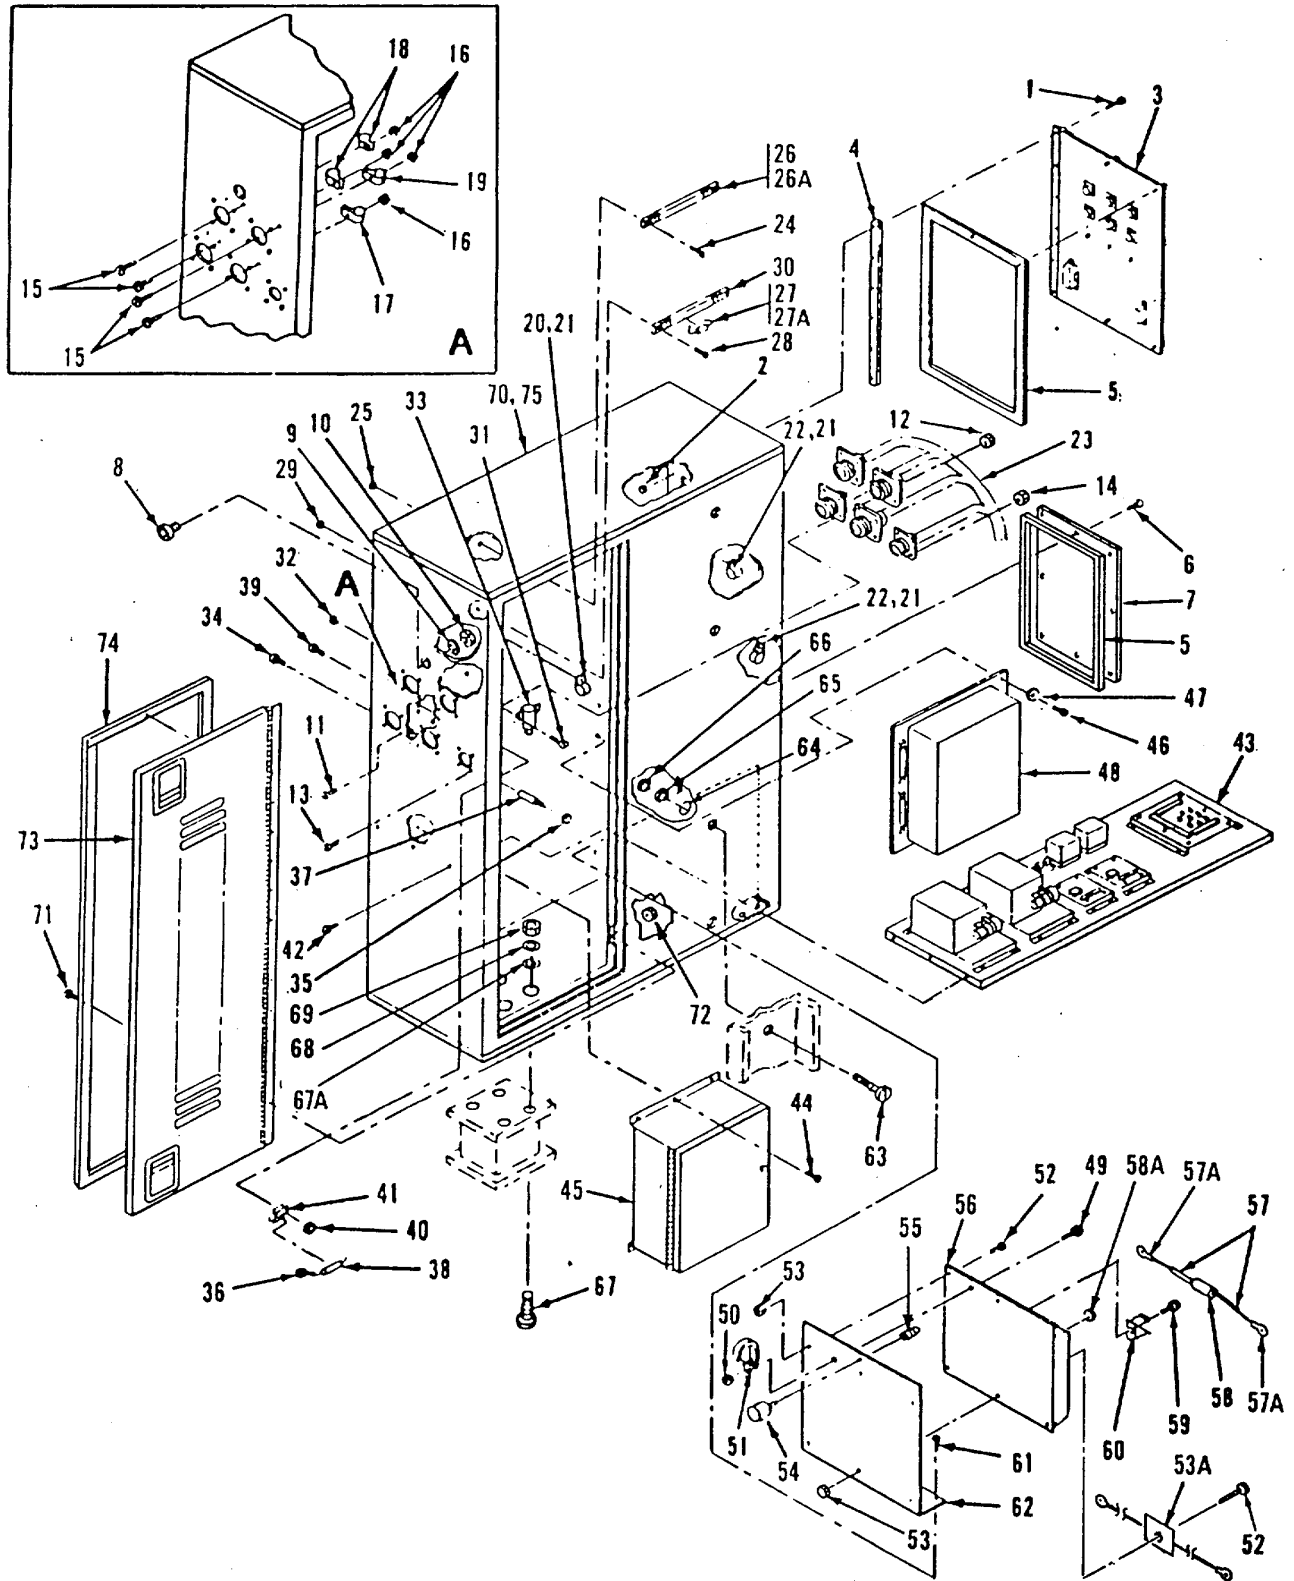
AC-DC Control Box Assembly, Exploded View
